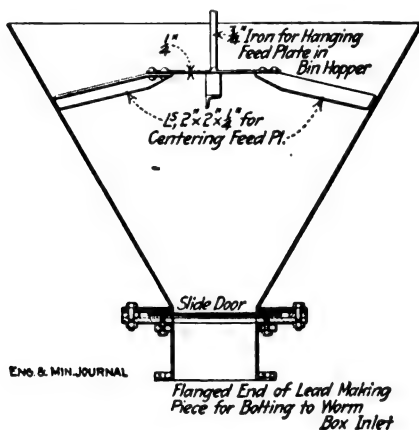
FEED HOPPER FOR DRY MILLING.
